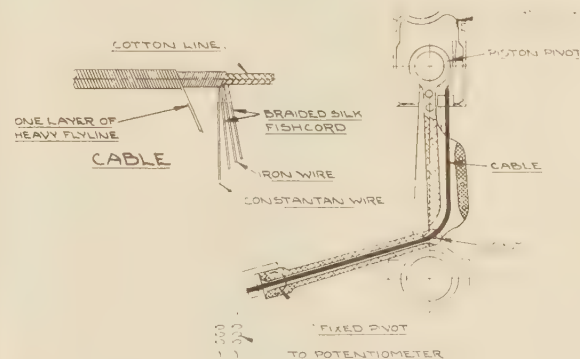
SCHEMATIC DIAGRAM OF CABLE-TYPE PISTON-TEMPERATURE INDICATOR
